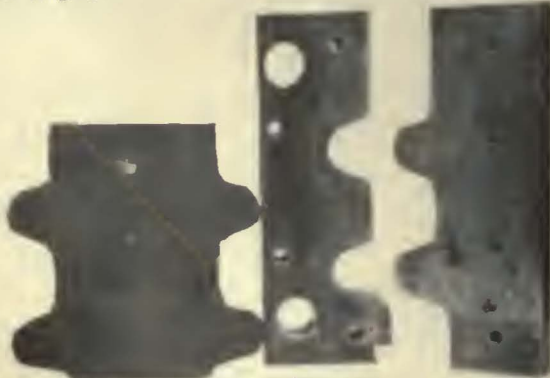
Case-Hardened Wear Plates Are Bolted to Projecting Ears on Journal Boxes. The Pieces Are Cut to Proper Shape in a Punch Press
